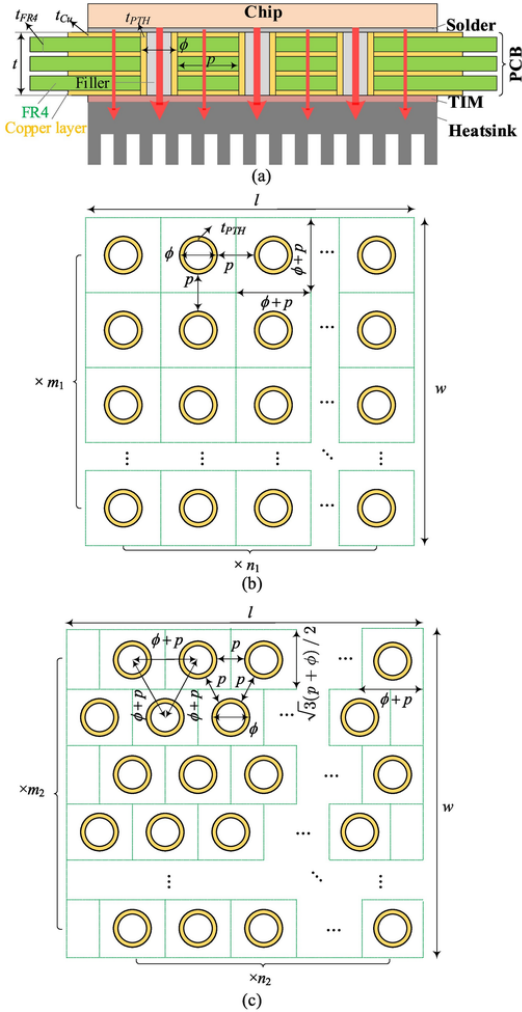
(a) Vertical structure of a multilayer PCB with plated through holes (vias). Top view of a via array in (b) pattern I and (c) pattern II.
